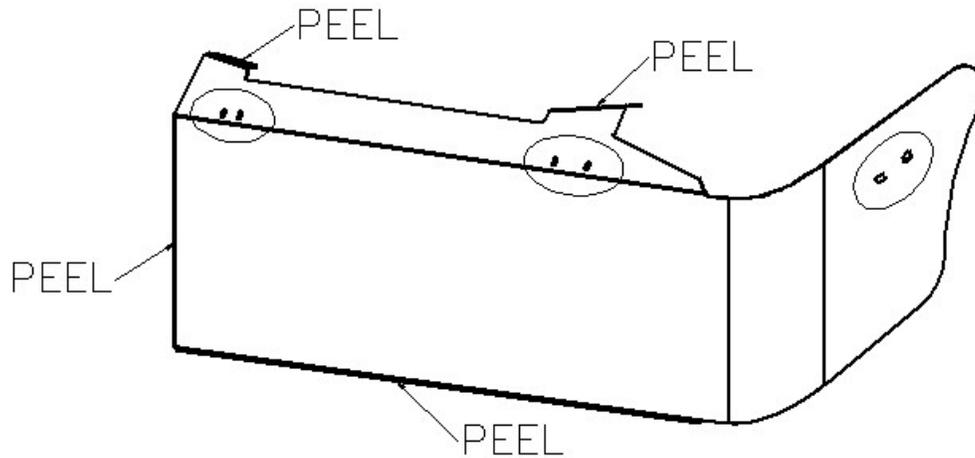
Flanges & Holes to Remove Protective Plastic From (driver side shown)
